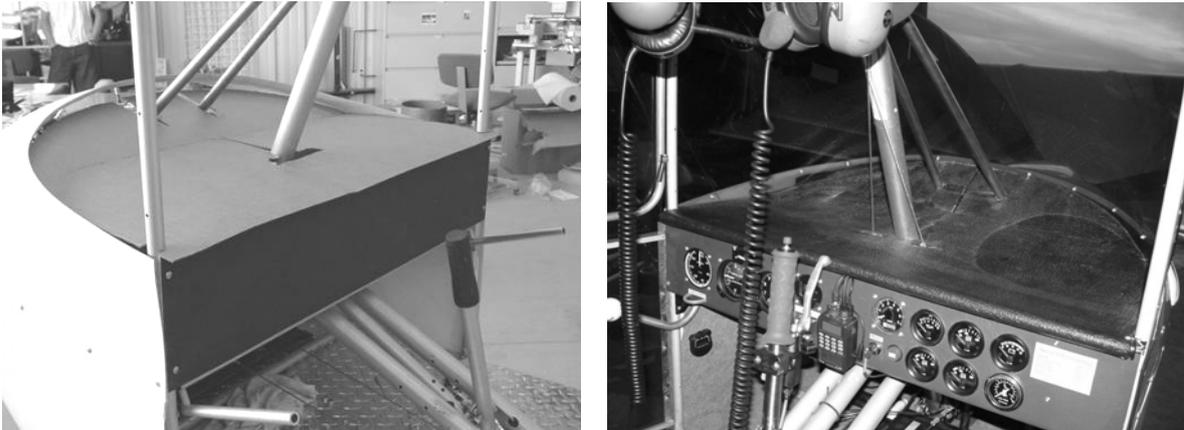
; fitting using cardboard templates, and the result, a (well used) dash board.
